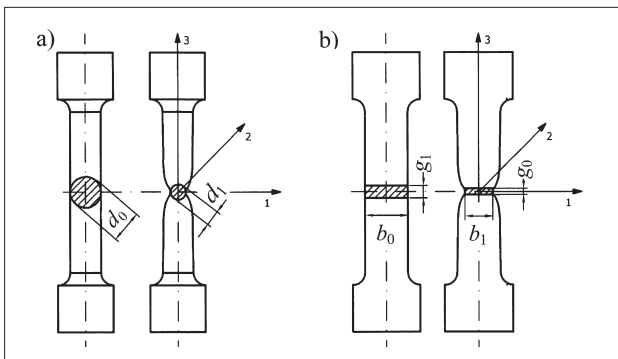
Typical tensile specimens: a) a round specimen, b) a flat specimen
